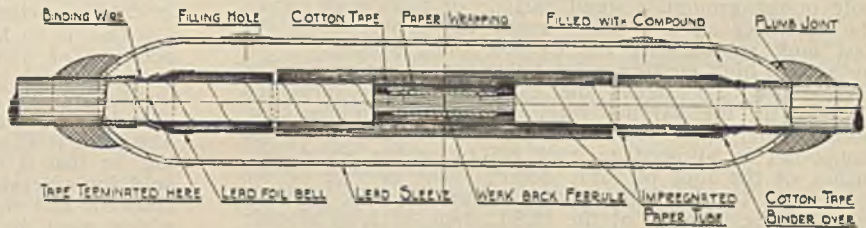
Joint on One Core of Three-core H.S.L. Cable.
